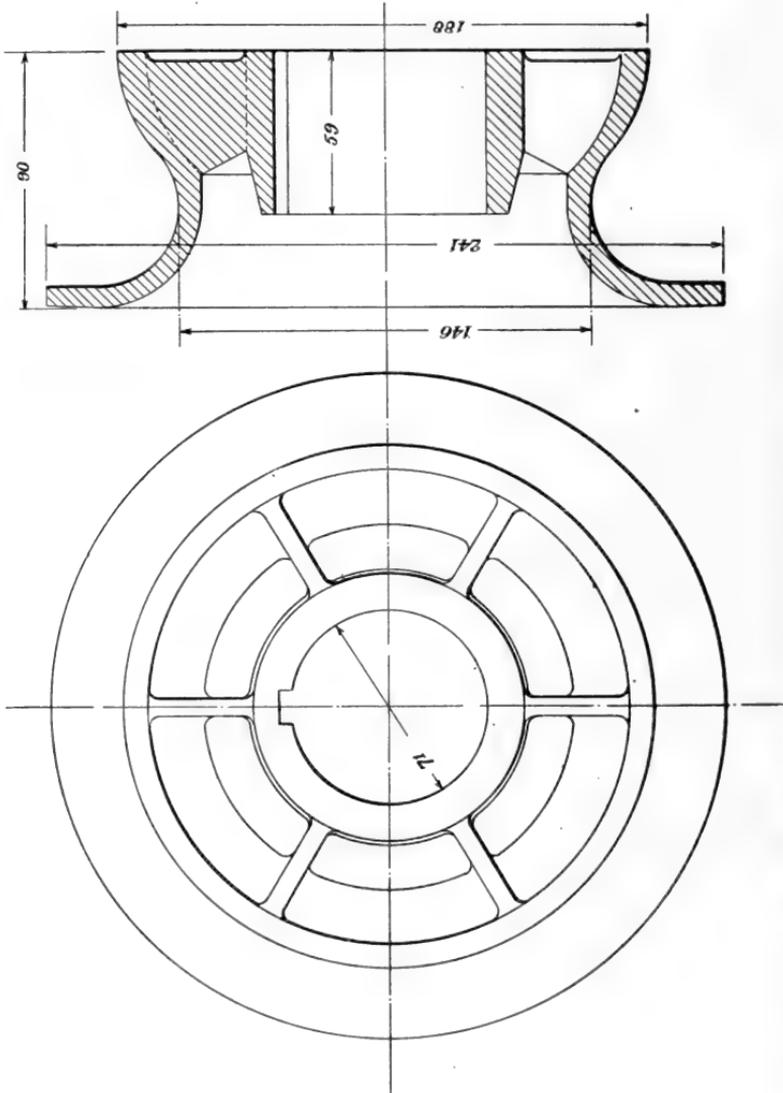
Armature End Bracket for 27 h. p. Railway Motor (Back End).
